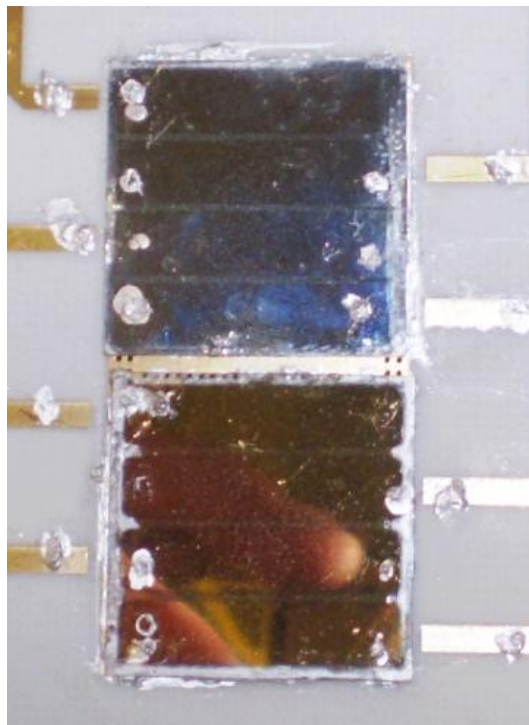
Photograph showing the silver paint extending over the edge of the ground plate. This reduces the distance between the ground plate and the bias-carrying tracks, which could cause breakdown to occur on the surface of the PCB.
